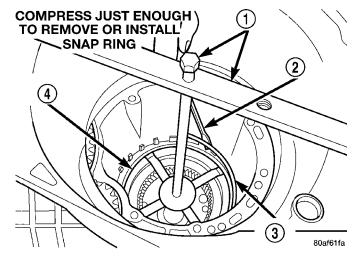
Remove 2/4 Clutch Retainer Snap Ring
